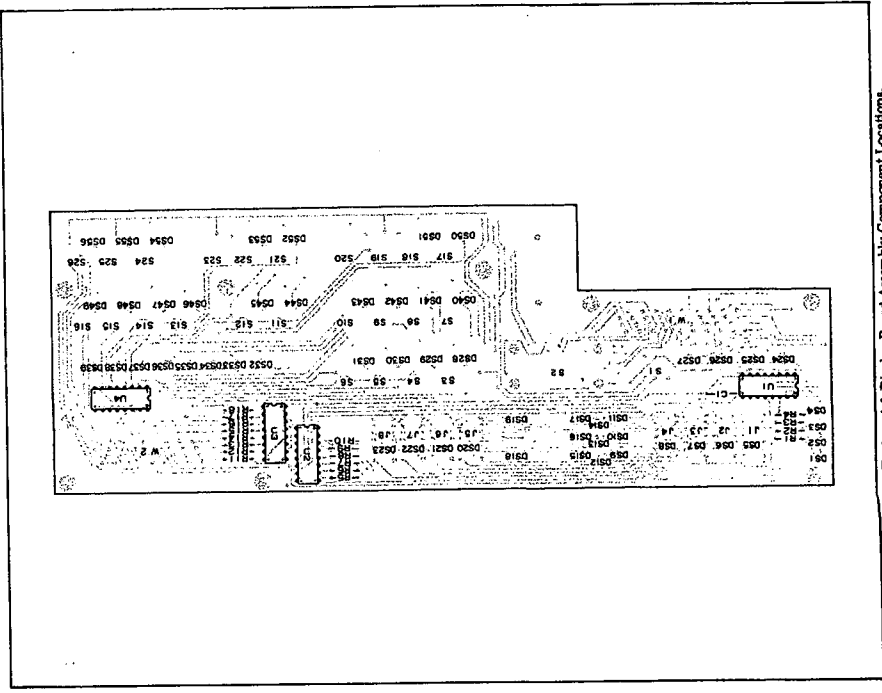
A3 Keyboard & Display Board Assembly Component Locations.
